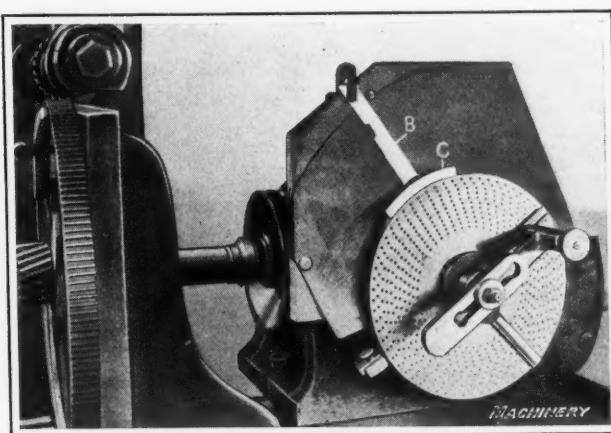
Index-head equipped for cutting Gears having a Prime Number of Teeth
